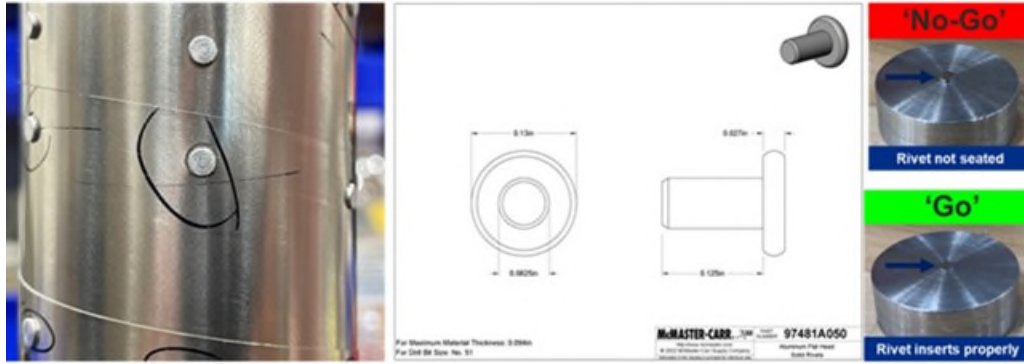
Non-concentric rivets that were causing issues with deployment reliability. A GSE was used to standardize the rivet tolerances by checking if the rivet is properly in the GSE machined features.
